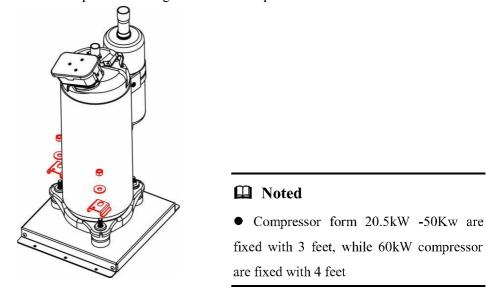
Removing the fixed sheet metal parts of the compressor
